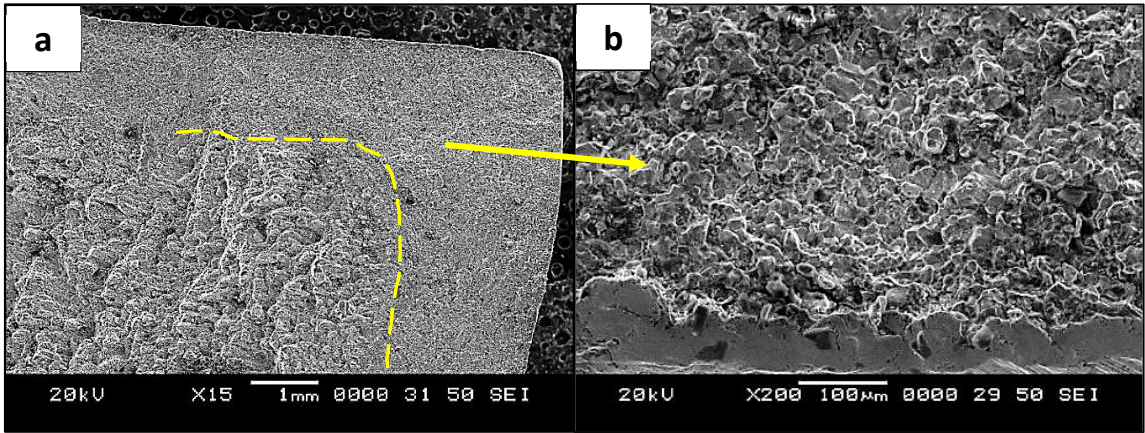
SEM fractographs of the failed jaw carrier showing: (a) two distinct fracture patterns at the carburized-case and the core, (b) brittle intergranular fracture feature at the case.
